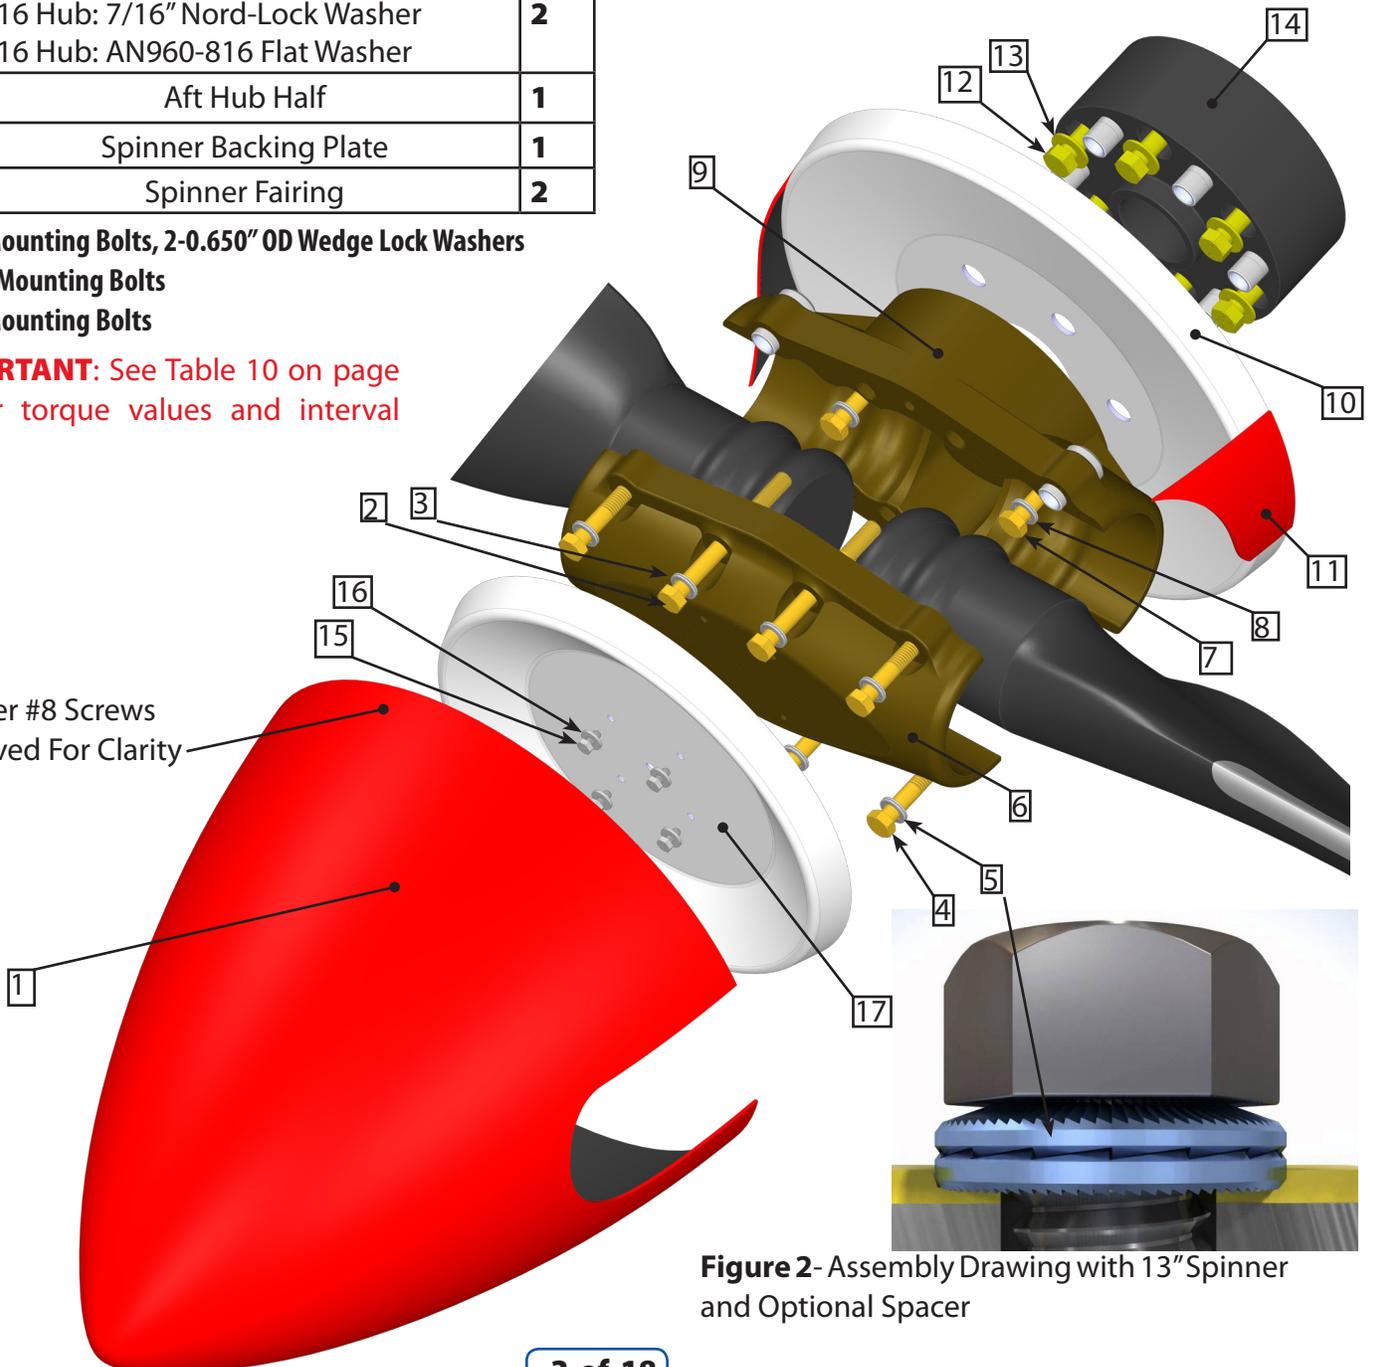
Assembly Drawing with 13" Spinner and Optional Spacer
